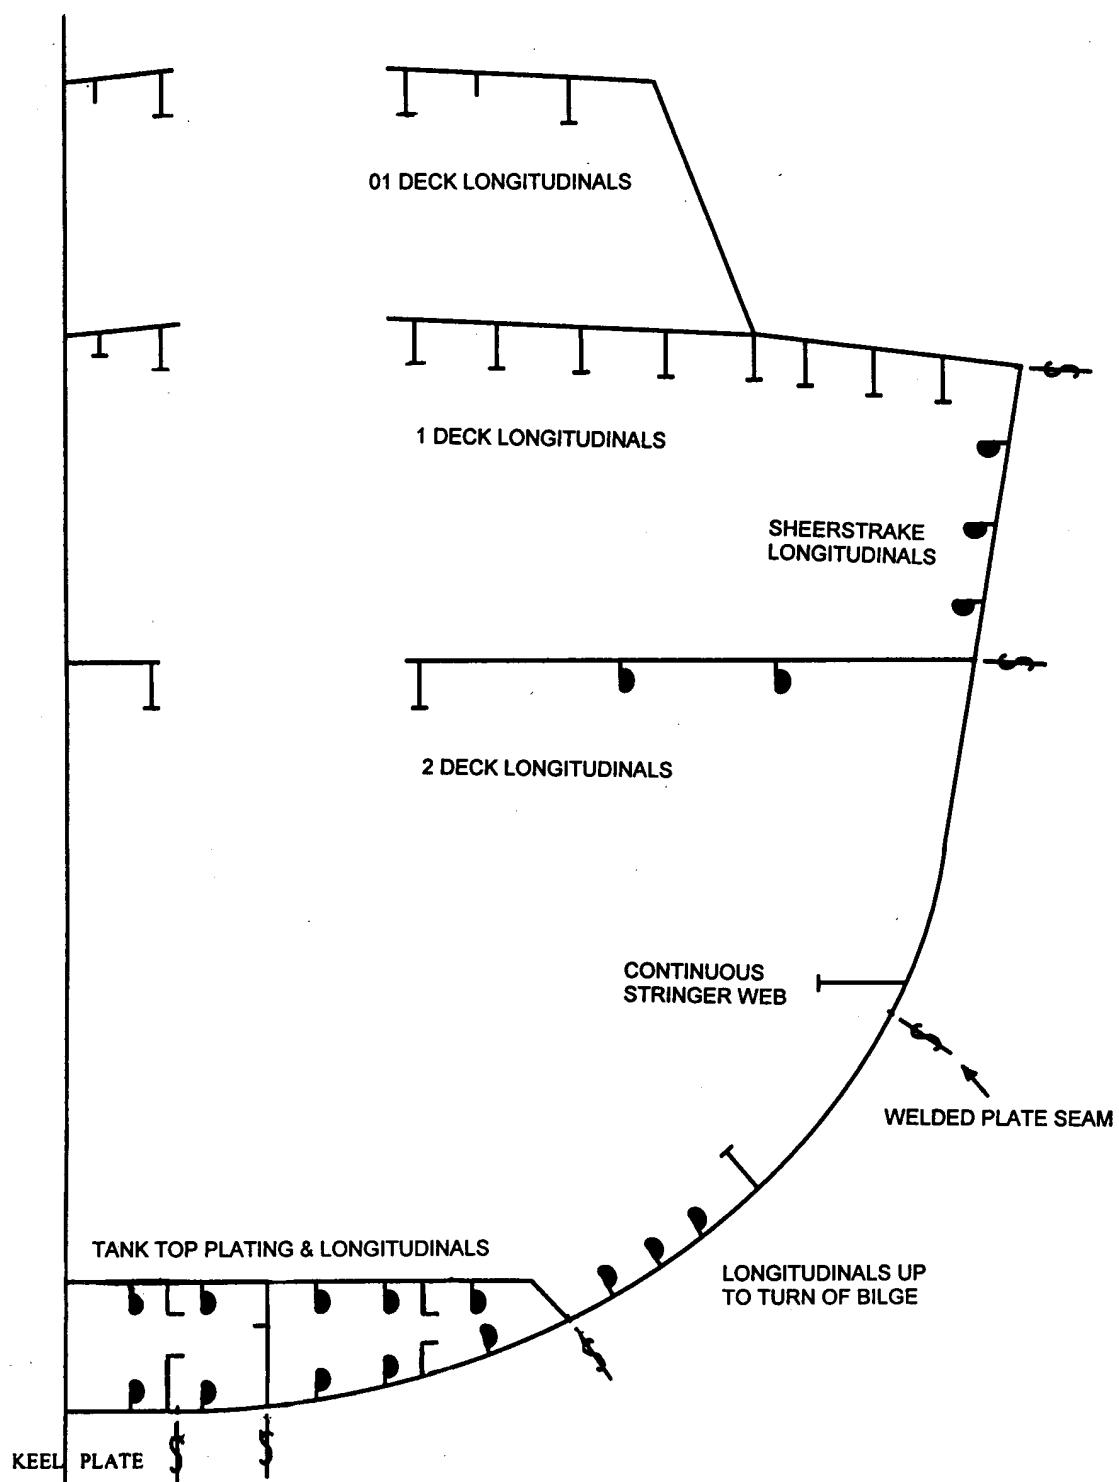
Section of a Typical All-welded Frigate
